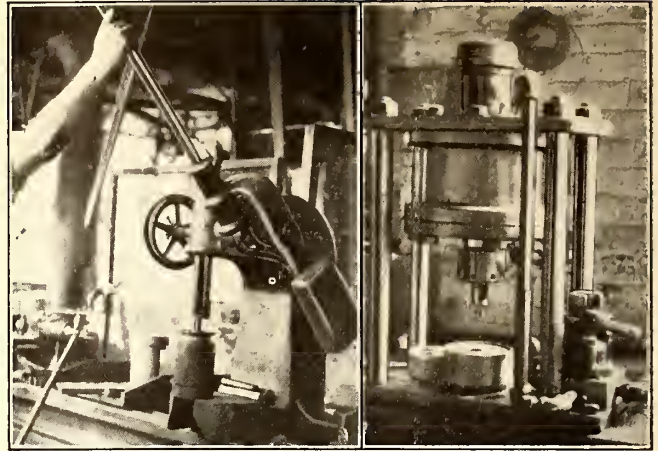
TURRET; FIG. 4—SPINDLE BONNET
